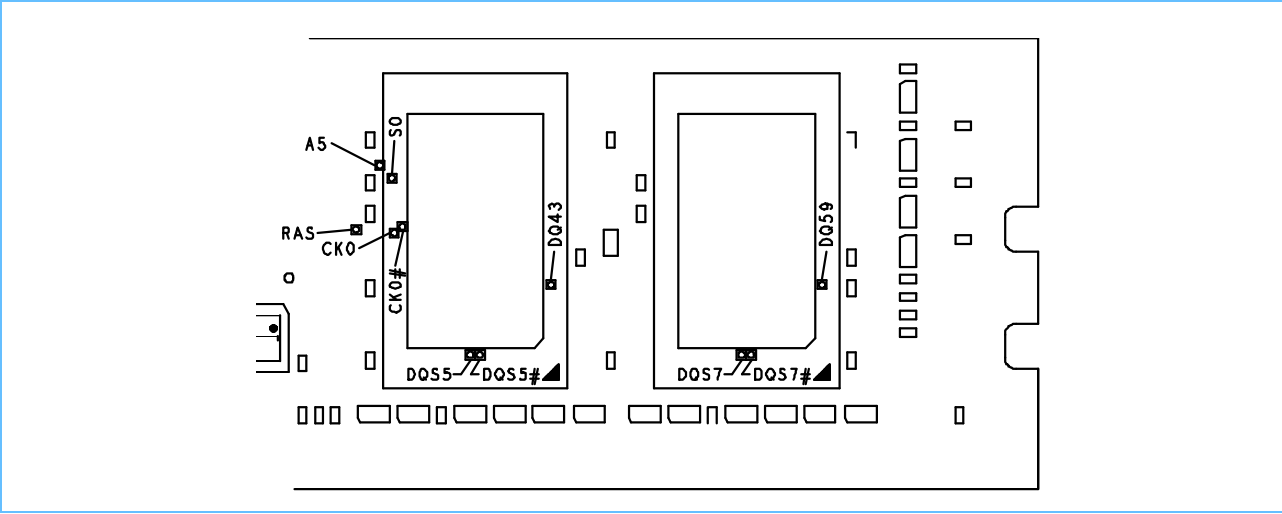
Test Point Identification (Raw Card Version F): Front, Right Side View
